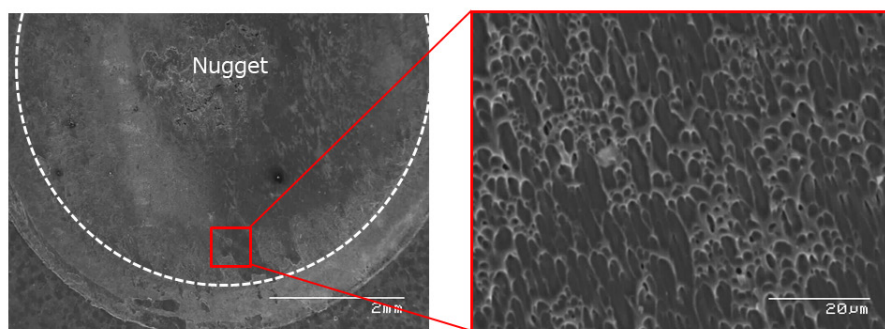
Fractography of same kind material joint of 1500HS steel on nugget edge
